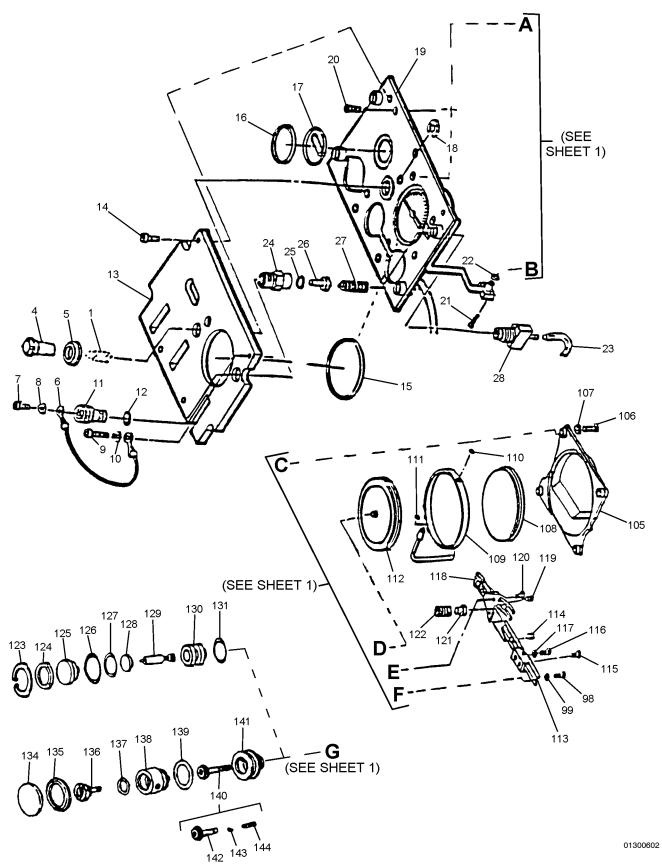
Aircraft Panel Mounted Regulators, 29270 and 3260011 (Sheet 2 of 2)
